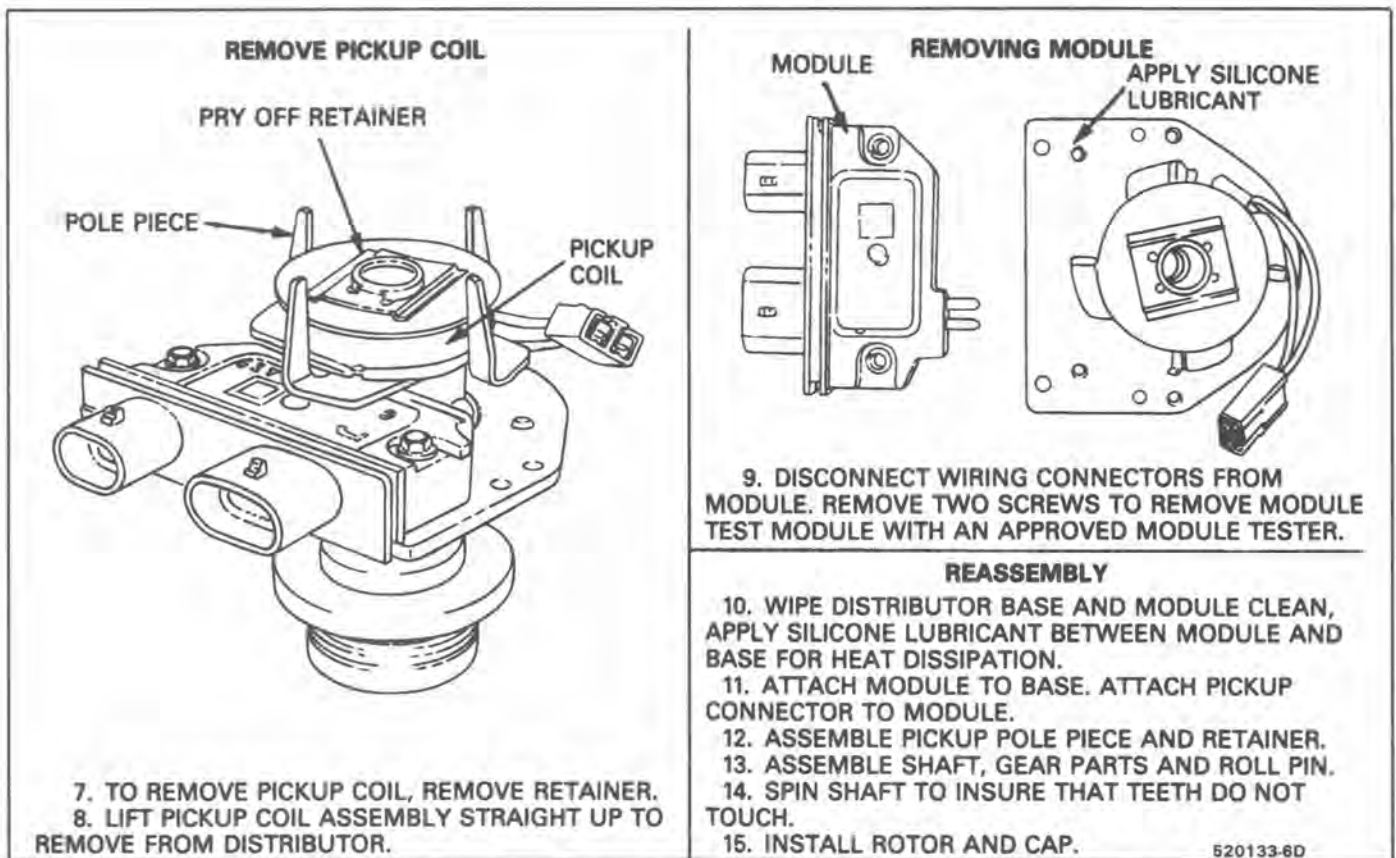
Distributor Disassembly, Test and Reassembly (Separate Coil) 2 of 2
